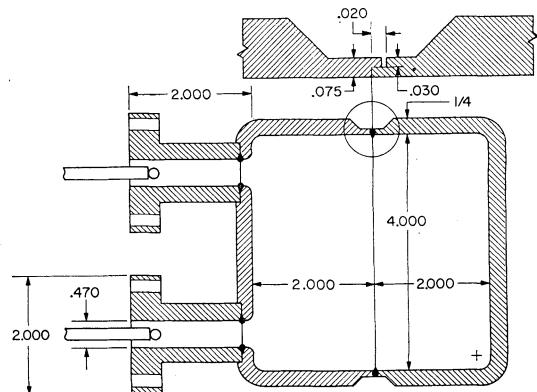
Niobium cavity with coupling loops. Dimensions are in inches, dots represent electron-beam welds.
